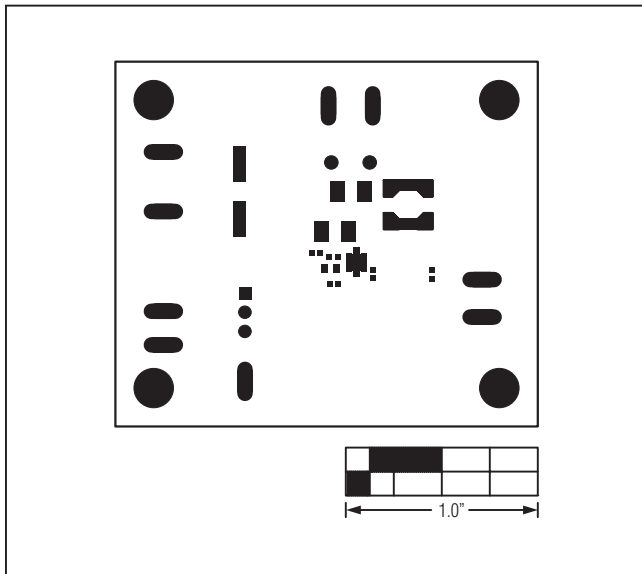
MAX17502E EV Kit PCB Layout—Top Solder Mask
